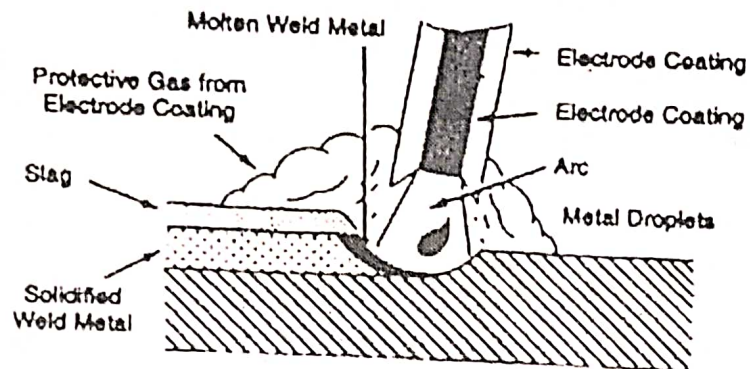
Schematic diagram of shielded metal arc welding (SMAW)
